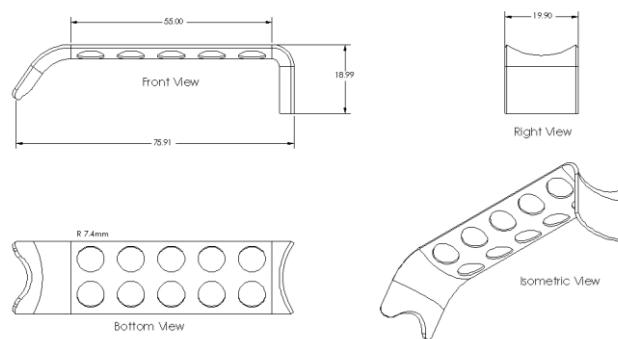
Proposed Design 2. CAD drawing of retractor blade, units MM
